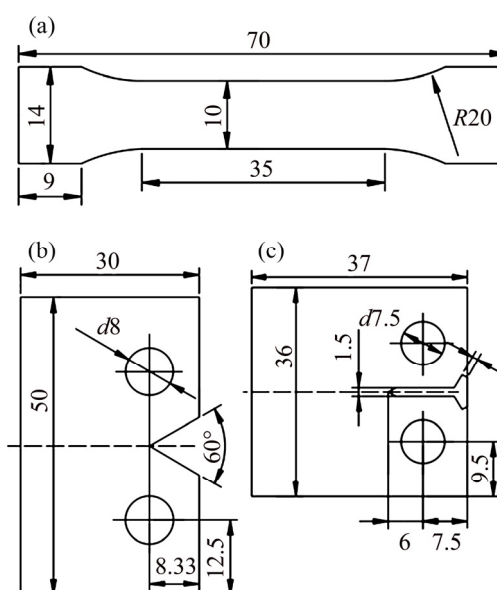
Samples for mechanical properties testing (unit: mm): (a) Room-temperature tensile test; (b) Kahn tear test; (c) Fatigue crack growth test
